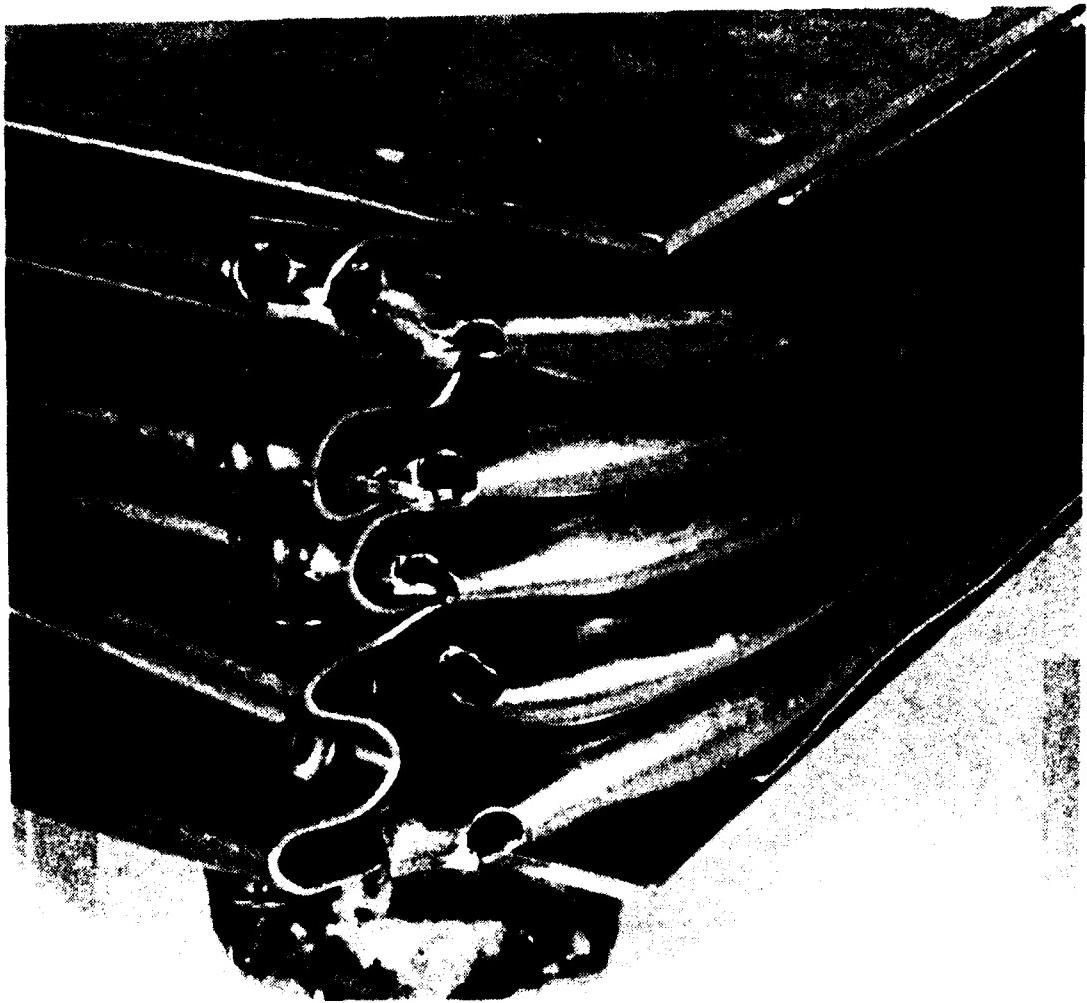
Test Specimen with Relocated Fasteners Showing Severe Fastener Failures at Edges
